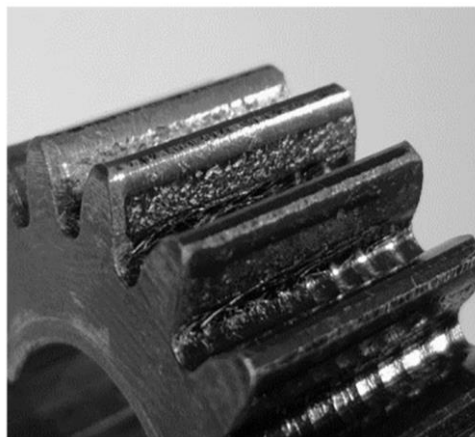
Traces of fatigue wear in form of pitting and spalling on gear wheel surface [7]
